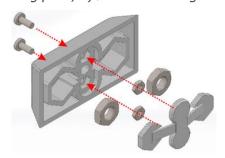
Assembling the fastener components installed on the ITSCAM 600
